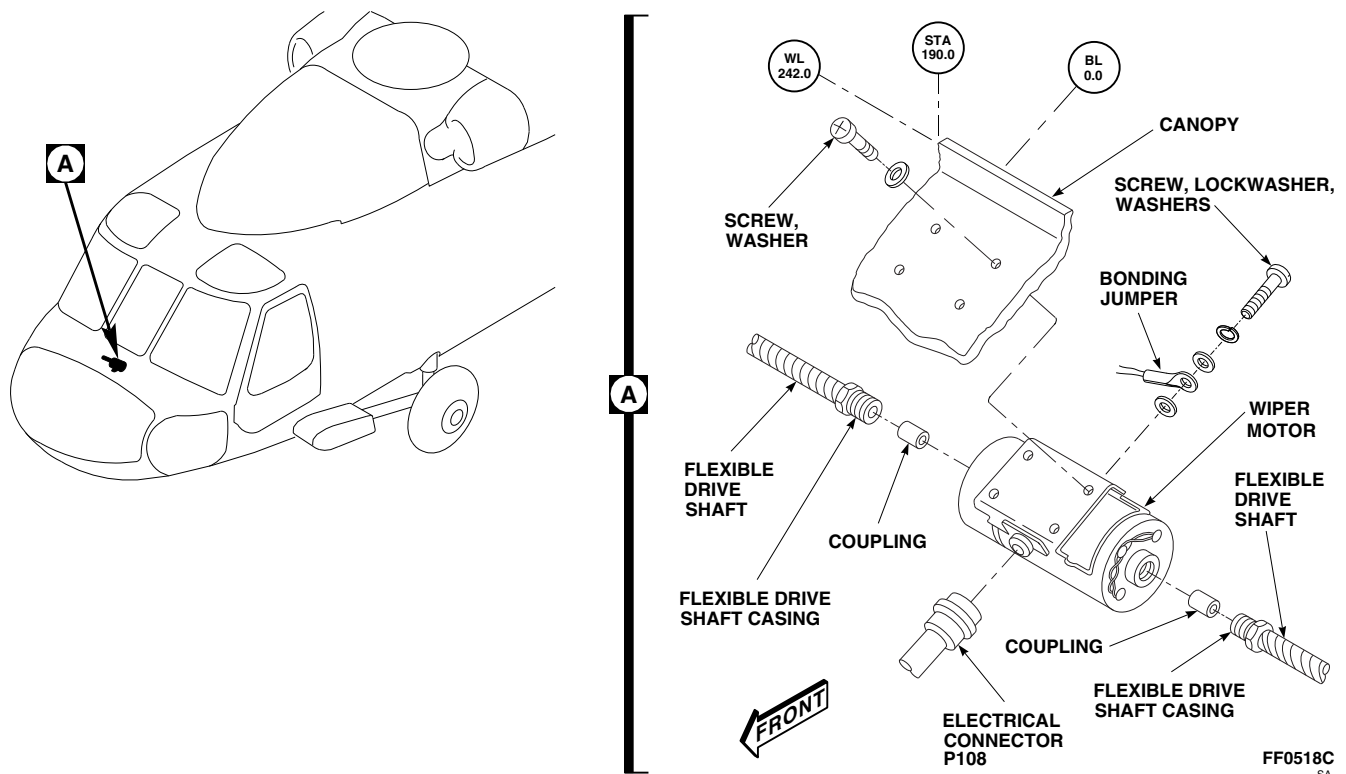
REPLACE WINDSHIELD WIPER MOTOR
